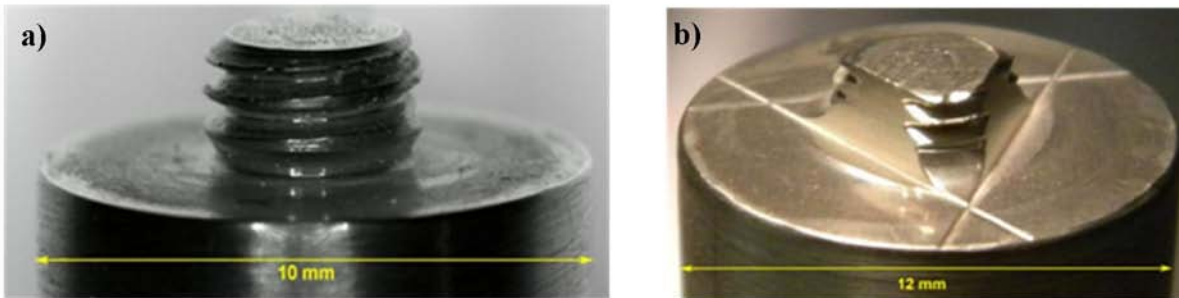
a) conventional threaded-pin tool, b) 3-flat pin tool.
